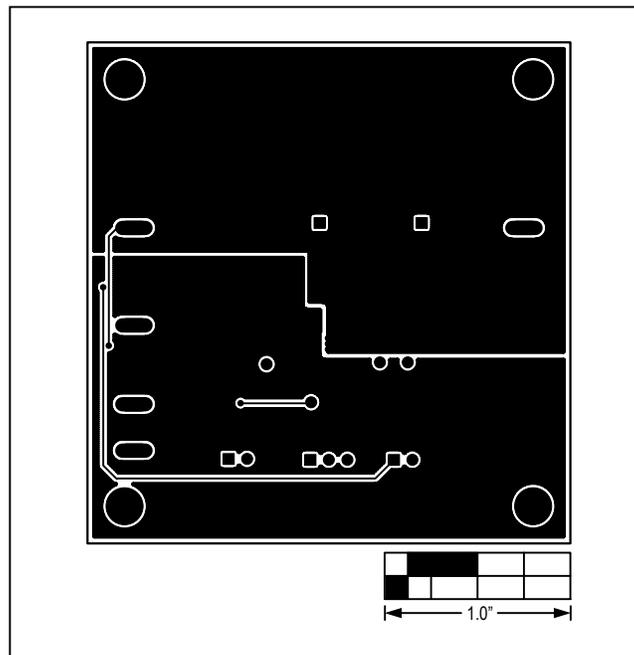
MAX15020 EV Kit PCB Layout—GND Layer 2
